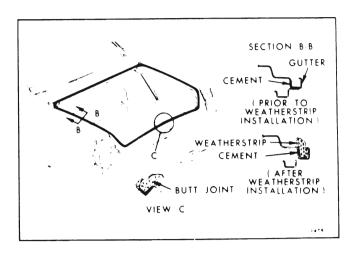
Rear Compartment Weatherstrip Assembly
